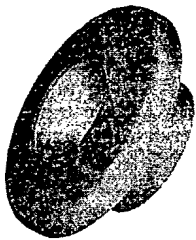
FIXED FOCUS EYEPiece ASSEMBLY
